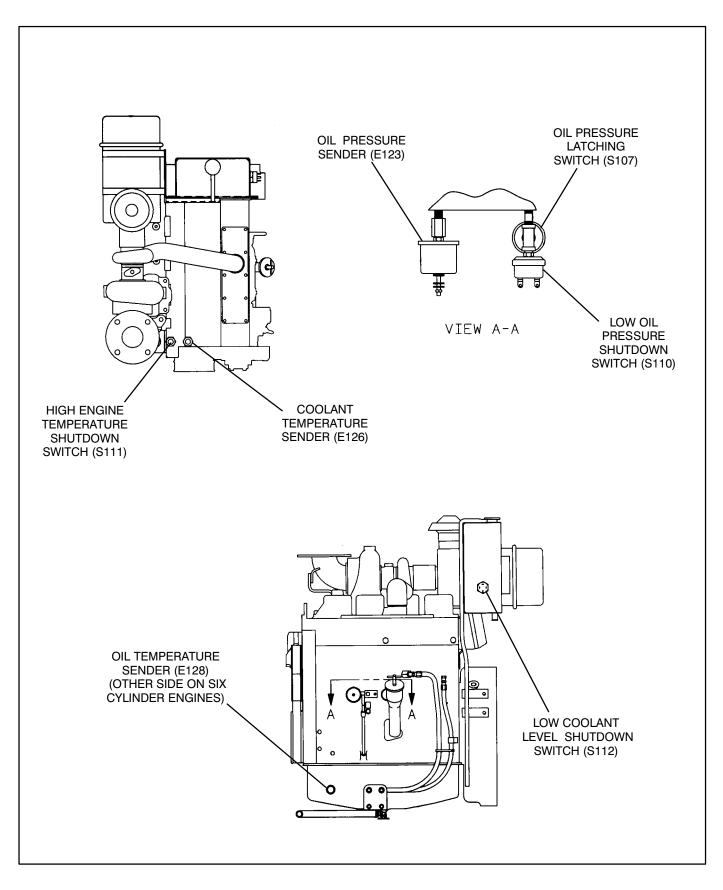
ENGINE SENSOR LOCATIONS
